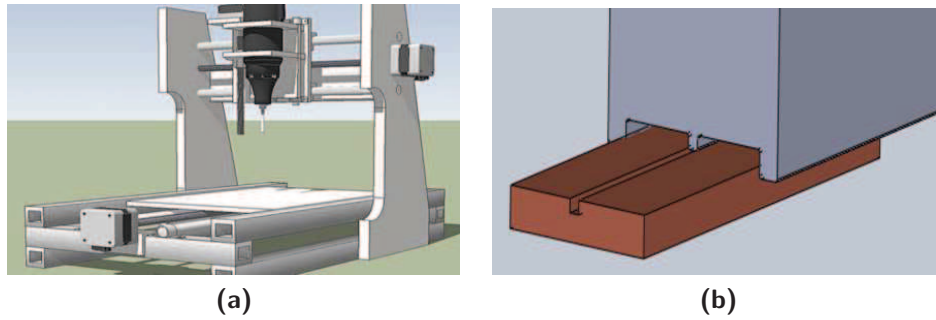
Copper holder realization: (a) by using CNC machine; (b) by imprinting technology.
